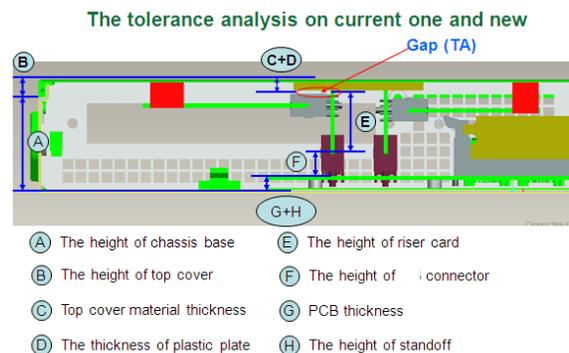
Tolerance Analysis on stack of mechanical parts
